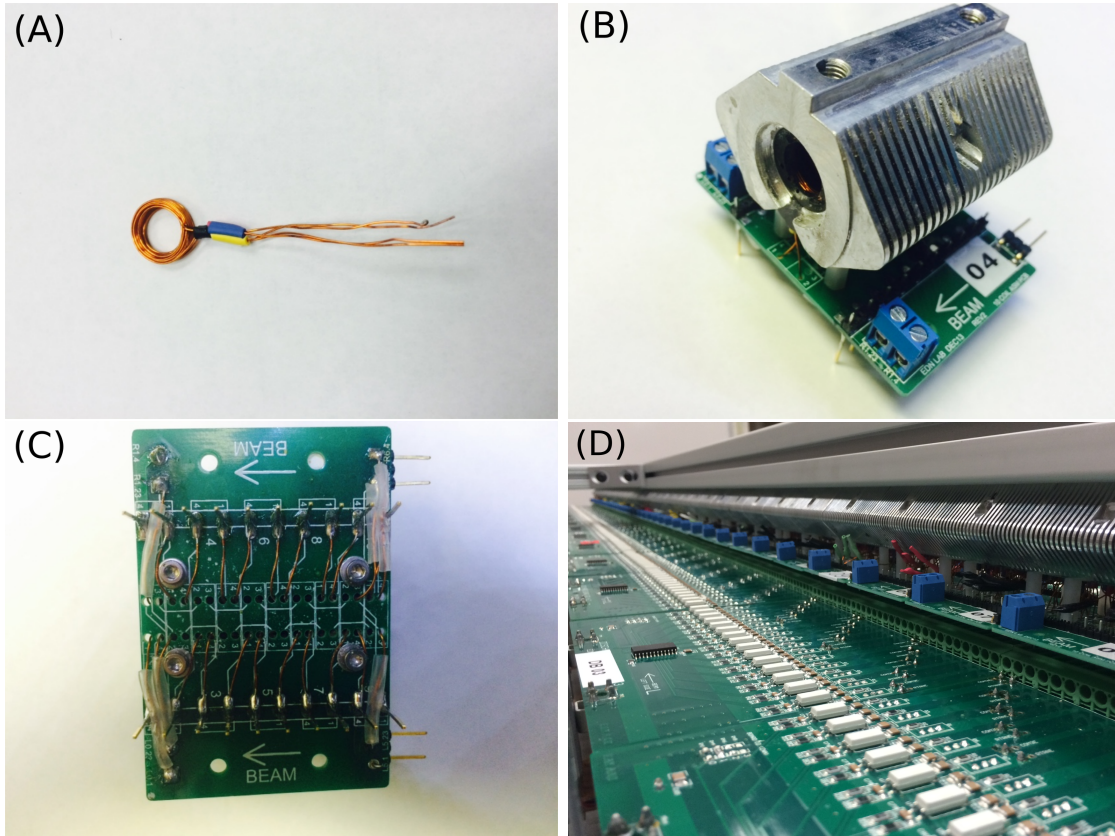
Assembly of trap coils. Shown figures are: a single coil pack unit (A), an aluminum heat sink unit with 10 coils pairs (B), the support board for a heat sink unit (C) and a top view of 480 coils assembled on discharge board (D).
